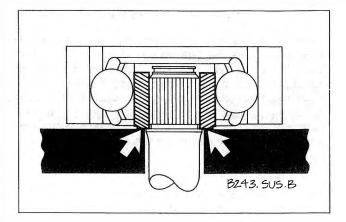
When pressing inner CV joint from axle shaft, support joint on inner hub only (arrows).
